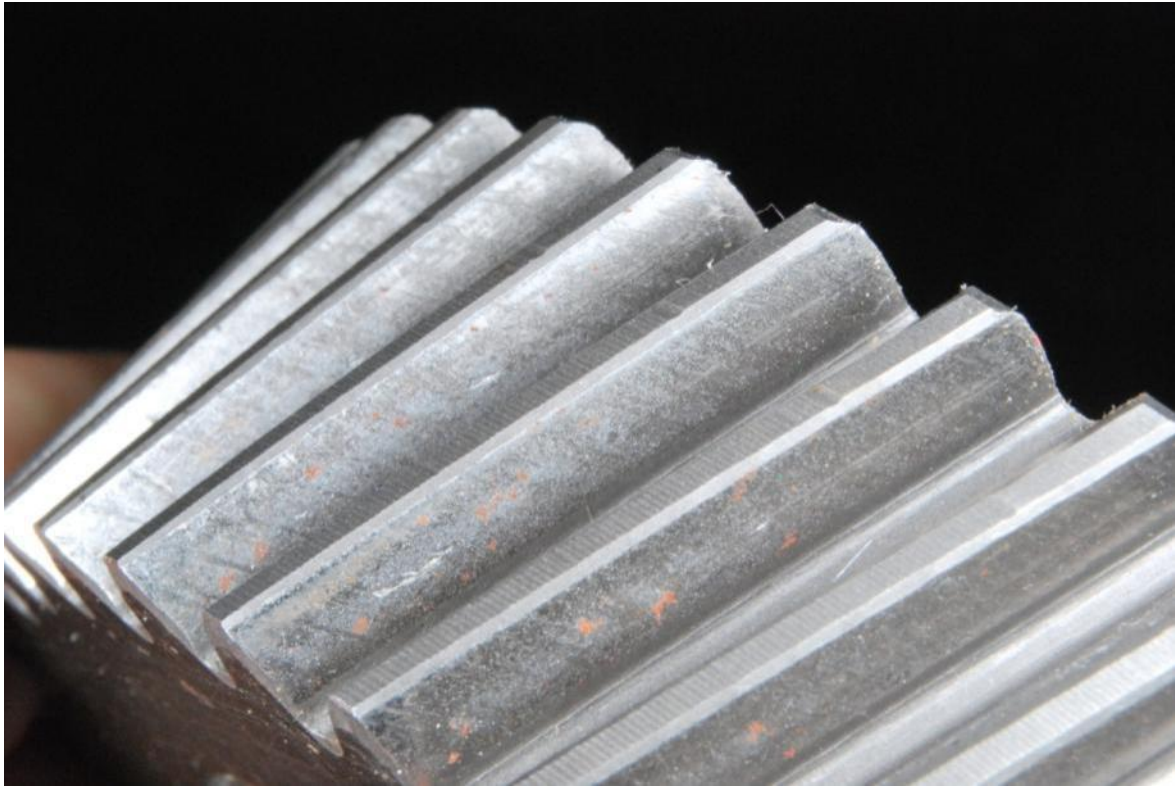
Silver Wing - There is no damage on the non-driving side of the idler gear teeth.
